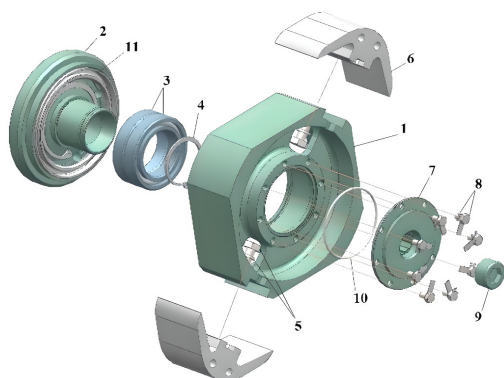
Squeezing element: 1- rotor, 2- base, 3- rolling bearings, 4- locking ring, 5- bolted connection elements (bolt, split washer), 6- shoe, 7- cover, 8- bolted connection elements (bolt, locking washer), 9- plug, 10- O-ring, 11- sleeve
